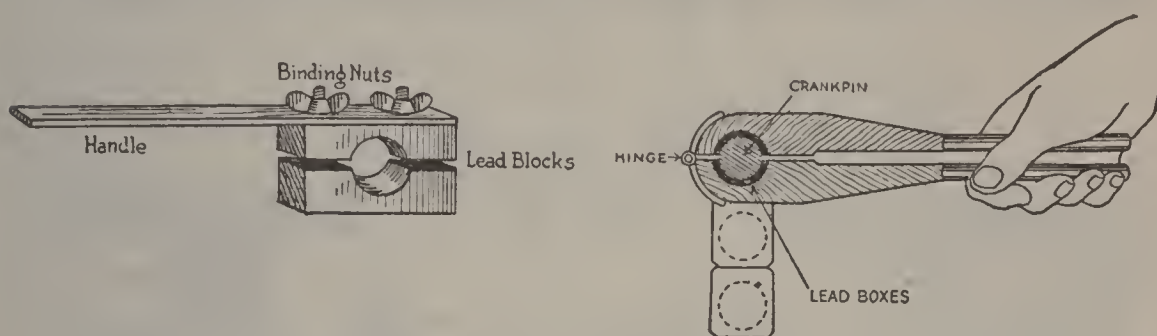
HAND LAPPING TOOLS FOR CRANKPINS
